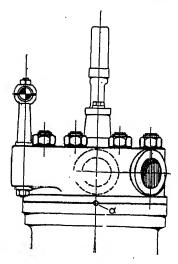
Plan of Cylinder Head of Four-cycle Engine.
